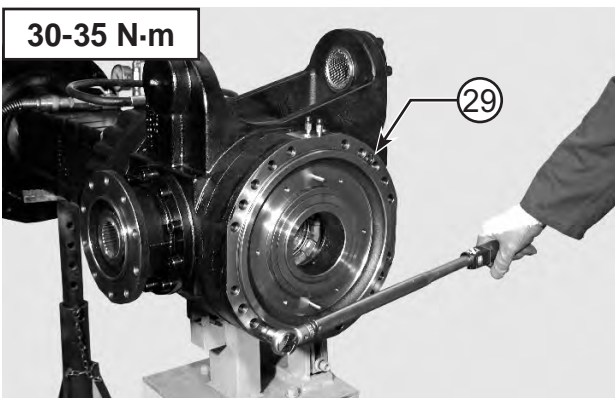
Tightening the screws (29) with a torque wrench set to 30 - 35 N·m.
